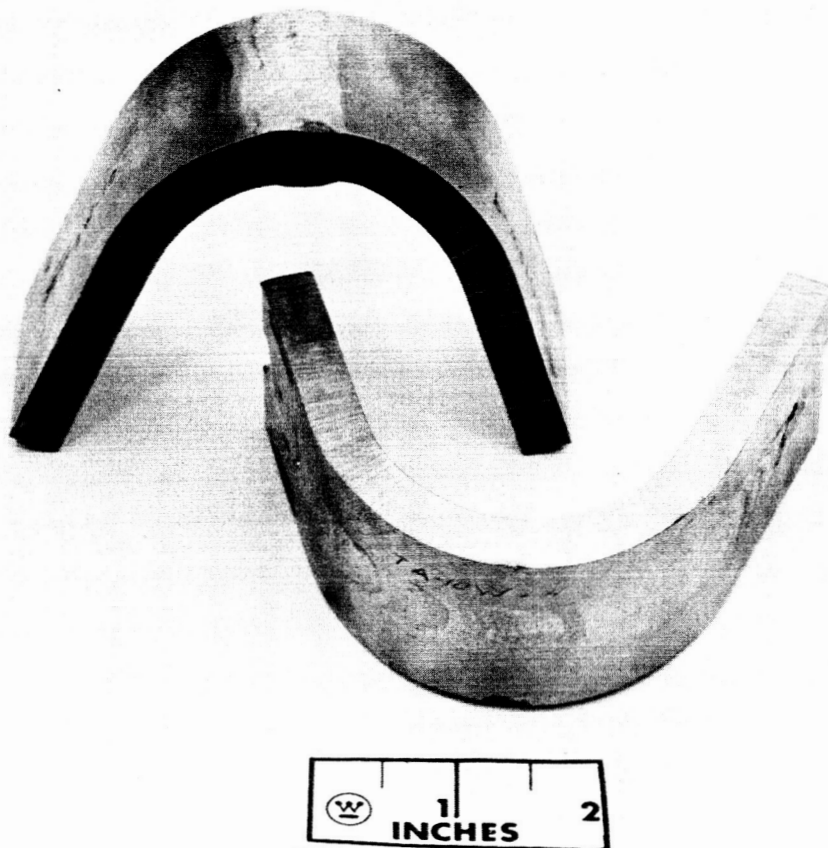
Plate Butt Weld Bend Test Fixture
